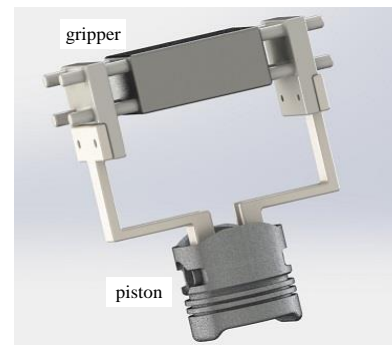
The piston should be squeezed in the inner cavity to ensure the gripper should not damage the surface of the piston.
